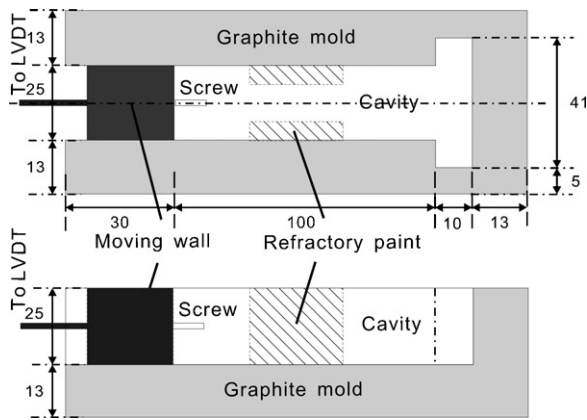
Schematic view of the experimental setup. Dimensions are given in millimeters.
